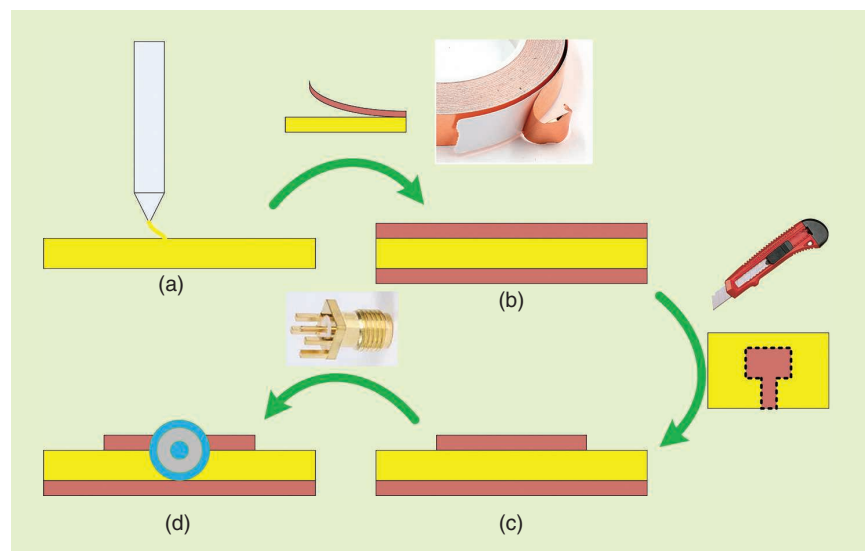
A schematic view of the fabrication process: (a) print laminate; (b) paste copper tape; (c) pattern with cutting; and (d) install connector for the VNA test.
